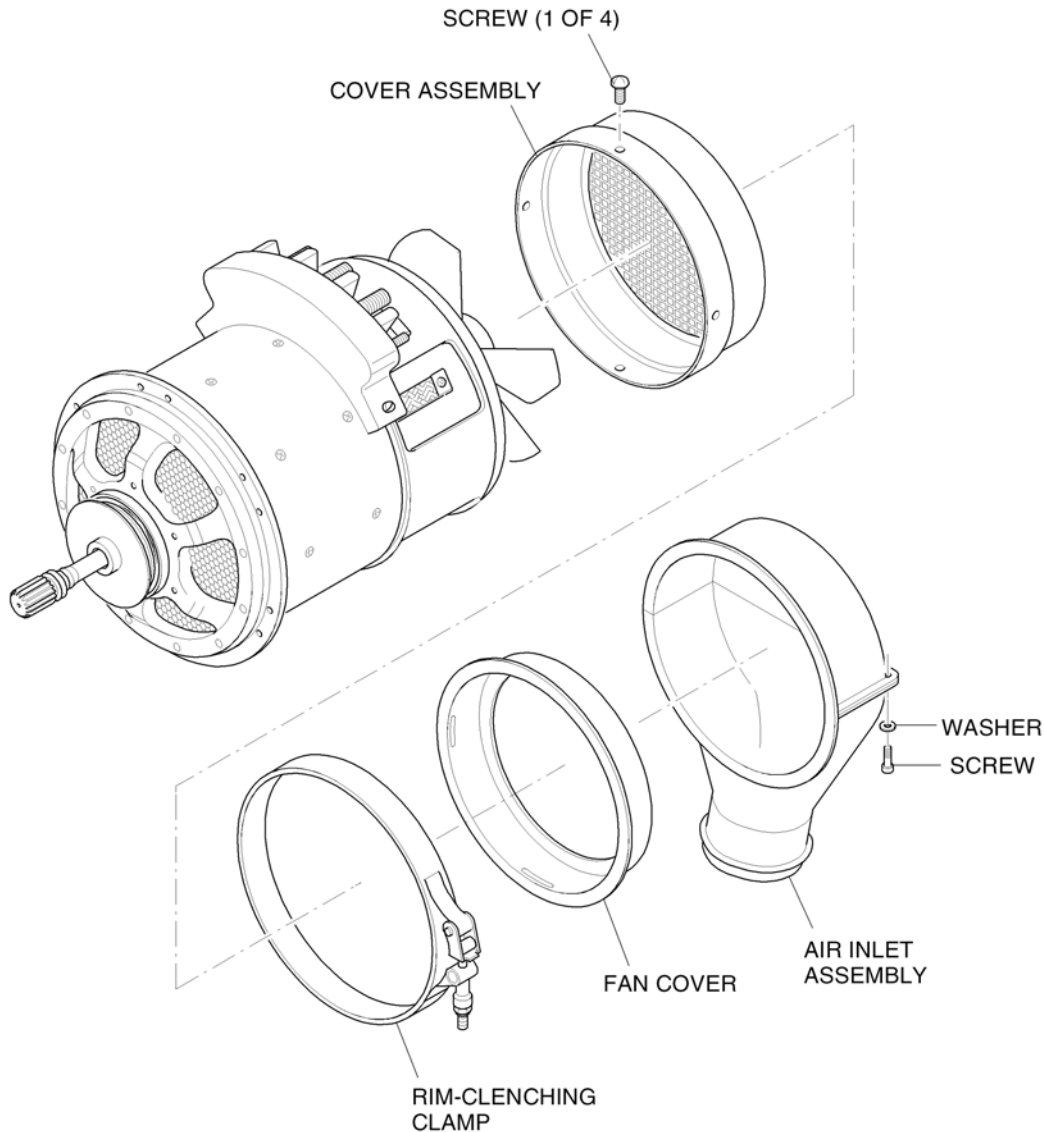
Removing Cover Assembly or Fan Cover and Air Inlet Assembly
